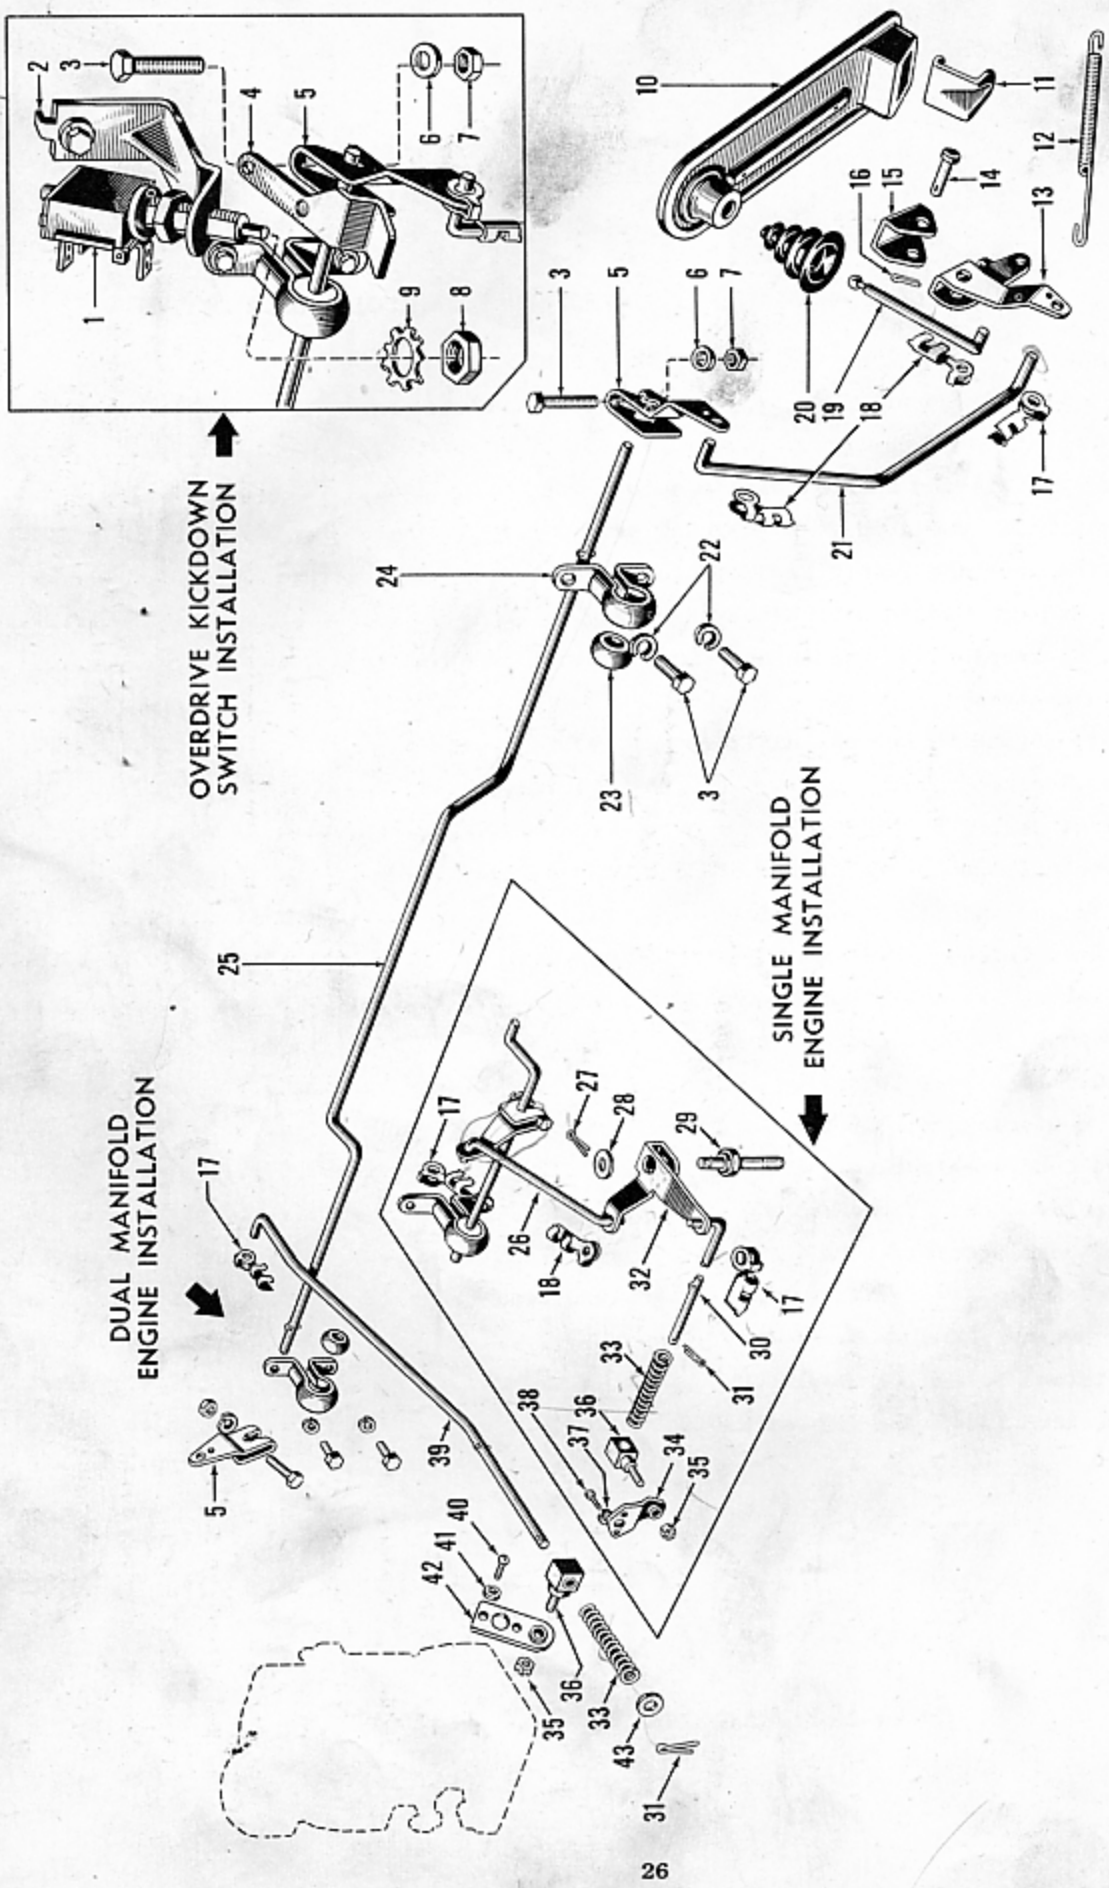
ACCELERATOR LINKAGE - EXPLODED VIEW
